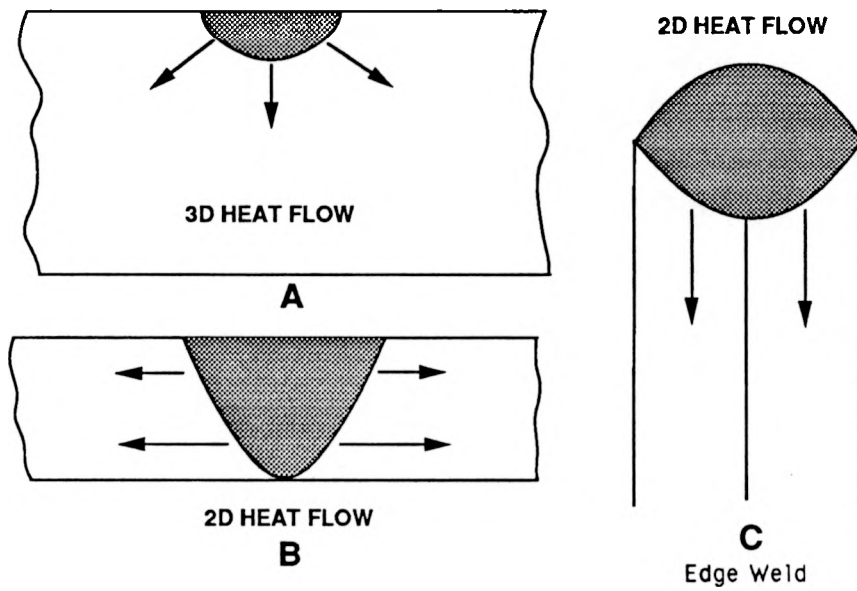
Dependence of heat flow geometry on weld joint design.
